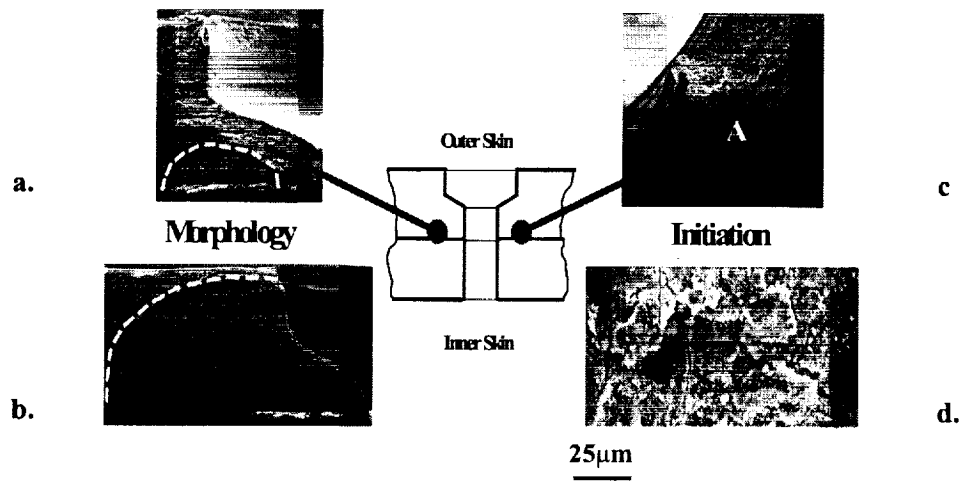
Counterbore rivet outer skin cracking: a) and b) SEM micrographs showing the progression of fatigue cracks (dashed lines mark the crack front), c) micrograph shows the rivet hole at an oblique angle and the location of fretting damage (region A) along the faying surface (site of crack initiation), and d) high magnification micrograph showing fretting debris and microcracks in “ region A of Figure 2c”.
